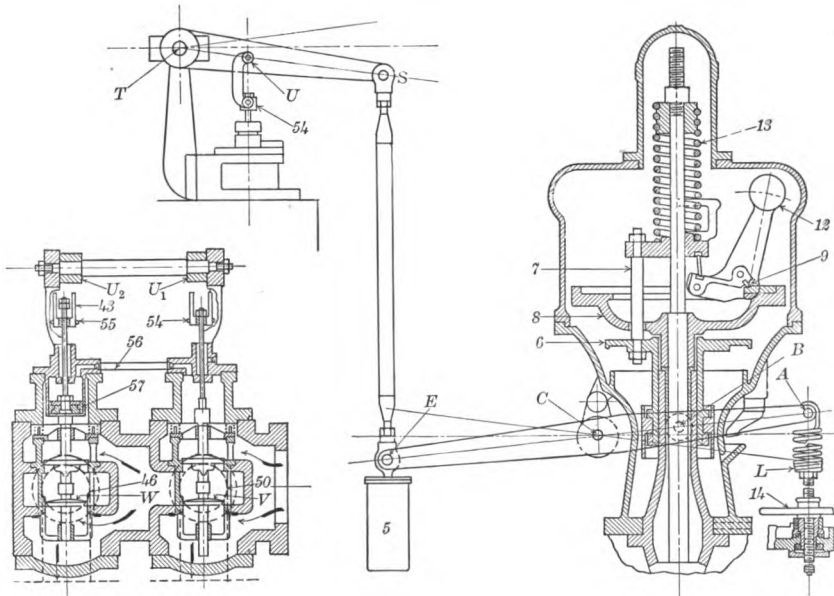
PRIMARY AND SECONDARY VALVES CONTROLLED BY "DIRECT" VALVE GEAR
